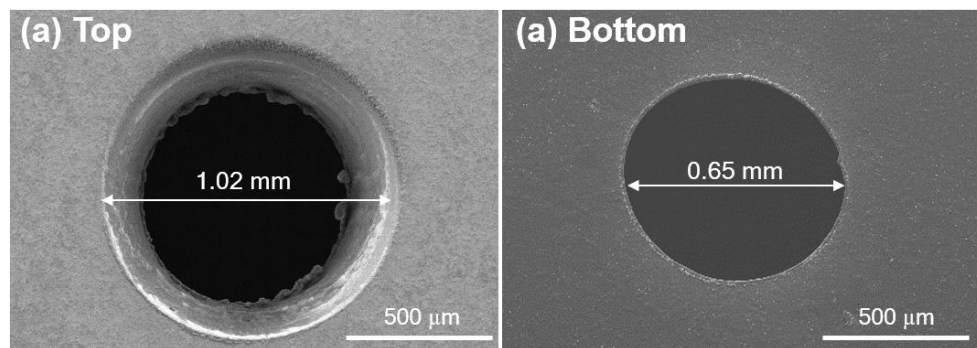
SEM images of a hole drilled after the first step during a double side drilling process: (a) top, and (b) bottom view.
